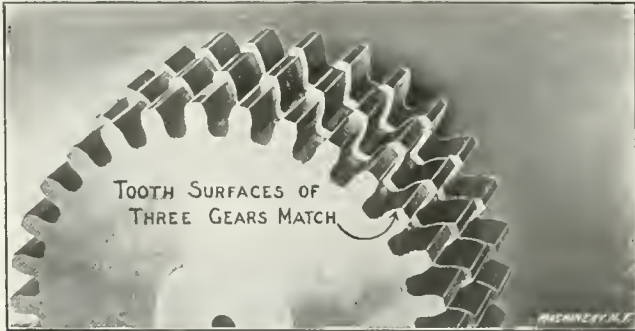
Tooth Surfaces of the Small, Normal and Large Gears Matched, to show that they are all made from the same involute
